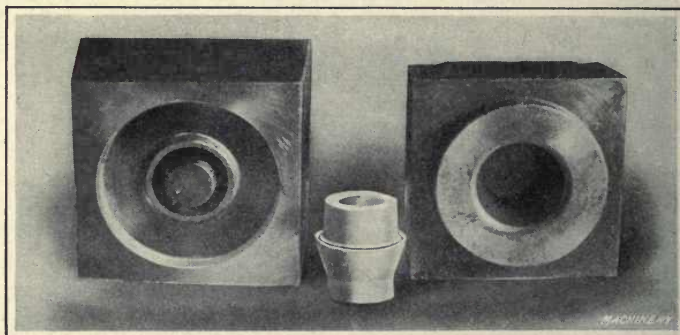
Upper and Lower Dies used in Press shown in Fig. 129.
